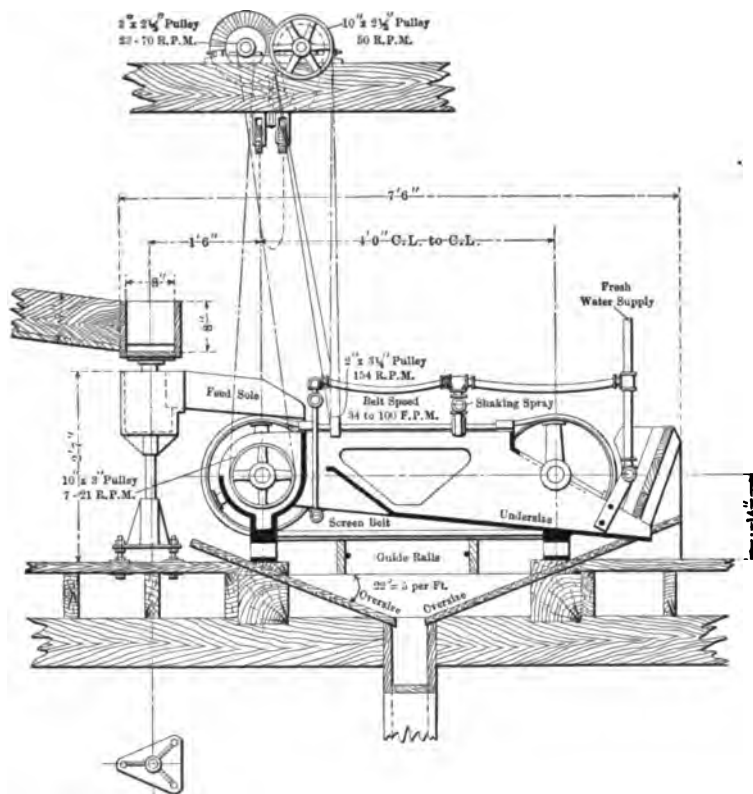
SIDE ELEVATION OF CALLOW DUPLEX SCREEN.
